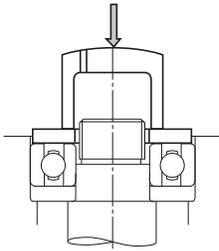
Simultaneous Press Fitting of Inner and Outer Rings
